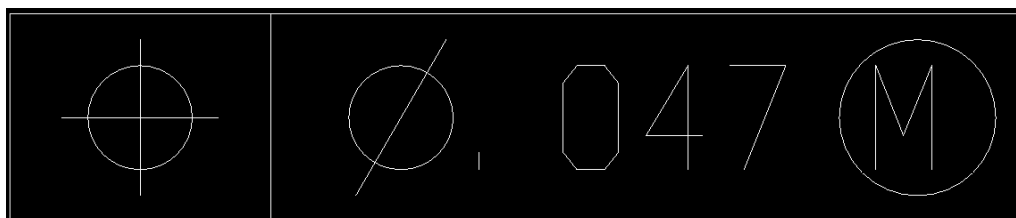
Geometric Dimension and Tolerance symbol
